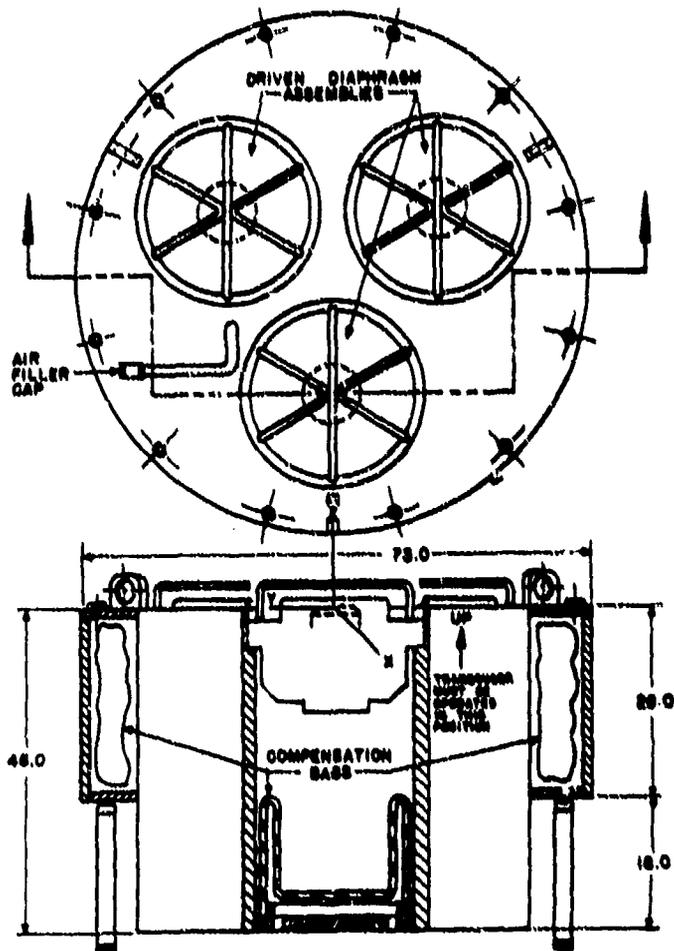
Dimensions (in centimeters) and orientation of type J15-3 transducer.
